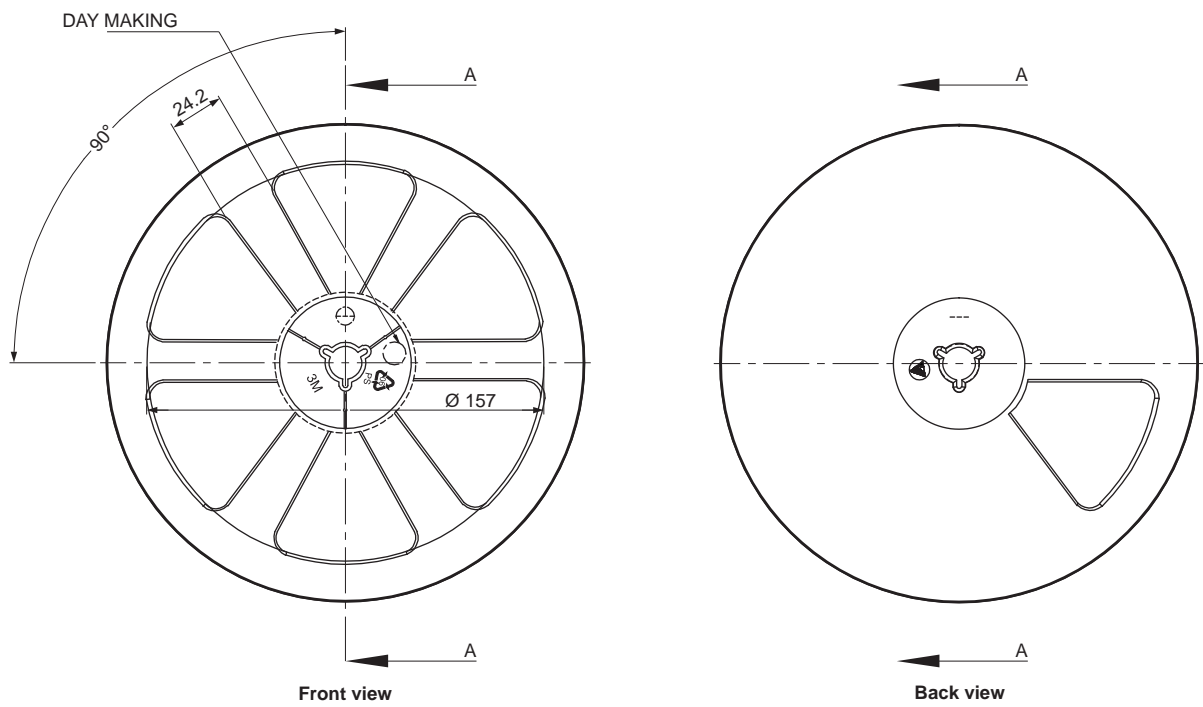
13" reel dimensions (13-inch diameter; 4-inch hub; 8 mm carrier tape)
